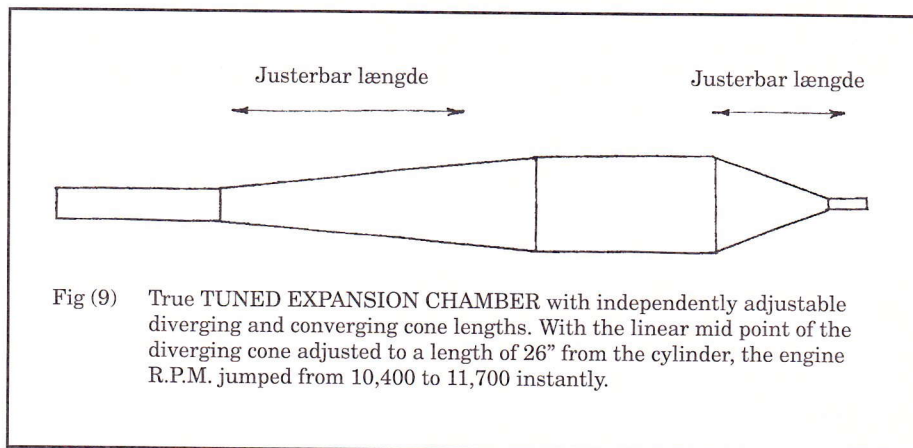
True TUNED EXPANSION CHAMBER with independently adjustable diverging and converging cone lengths. With the linear mid point of the diverging cone adjusted to a length of 26" from the cylinder, the engine R.P.M. jumped from 10,400 to 11,700 instantly.
